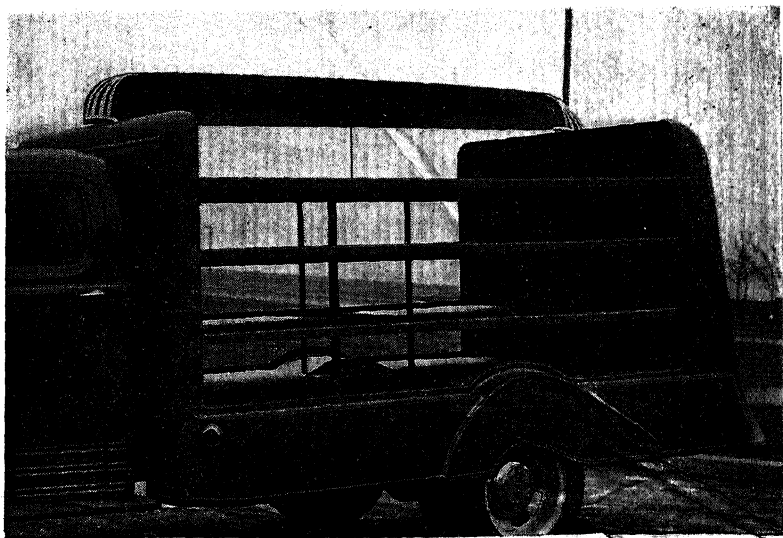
A welded steel body for a delivery truck. Changeover to this construction improved the appearance of the body, made it more rigid, cut weight and reduced construction costs materially.
